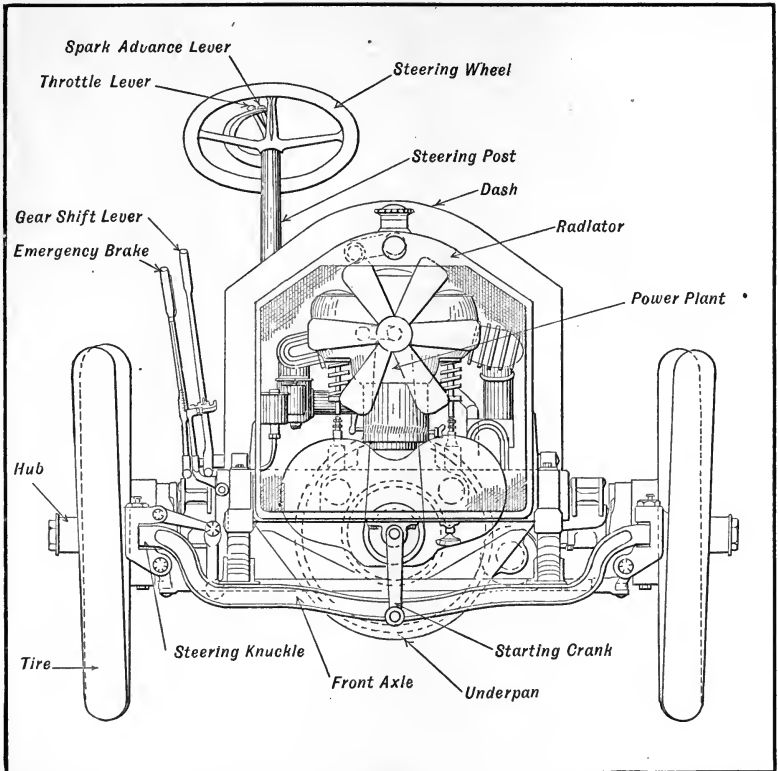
Front View of Gasoline Pleasure Car Chassis with Section of Radiator Broken Away to Show Placing of Power Plant in Frame.
